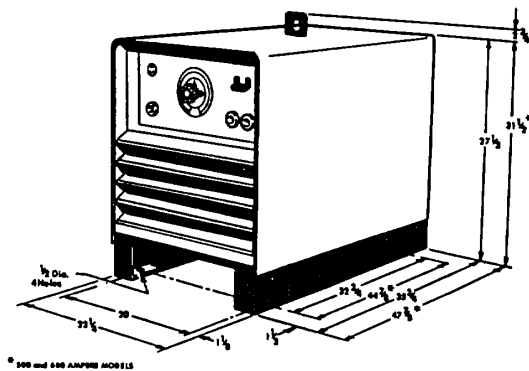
Dimensional Drawing and Base Mounting Hole Layout
